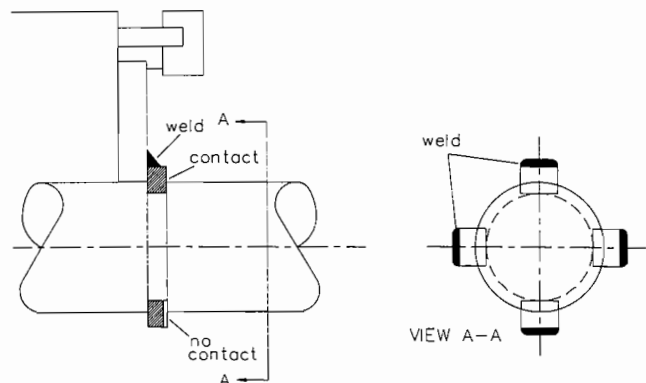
“4 Key” Attachment of Corepack to Shaft—Old Design.
